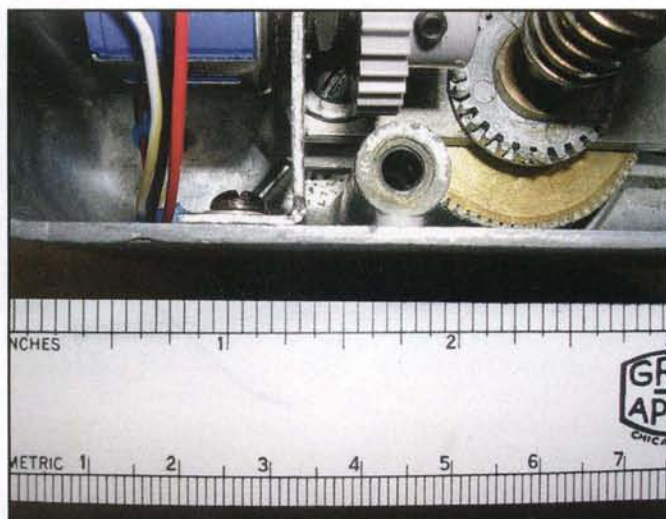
This picture shows the location of the potentiometer bracket in the EL rotator. Note the distance between the bracket and the hole in the bottom part of the rotator body.
